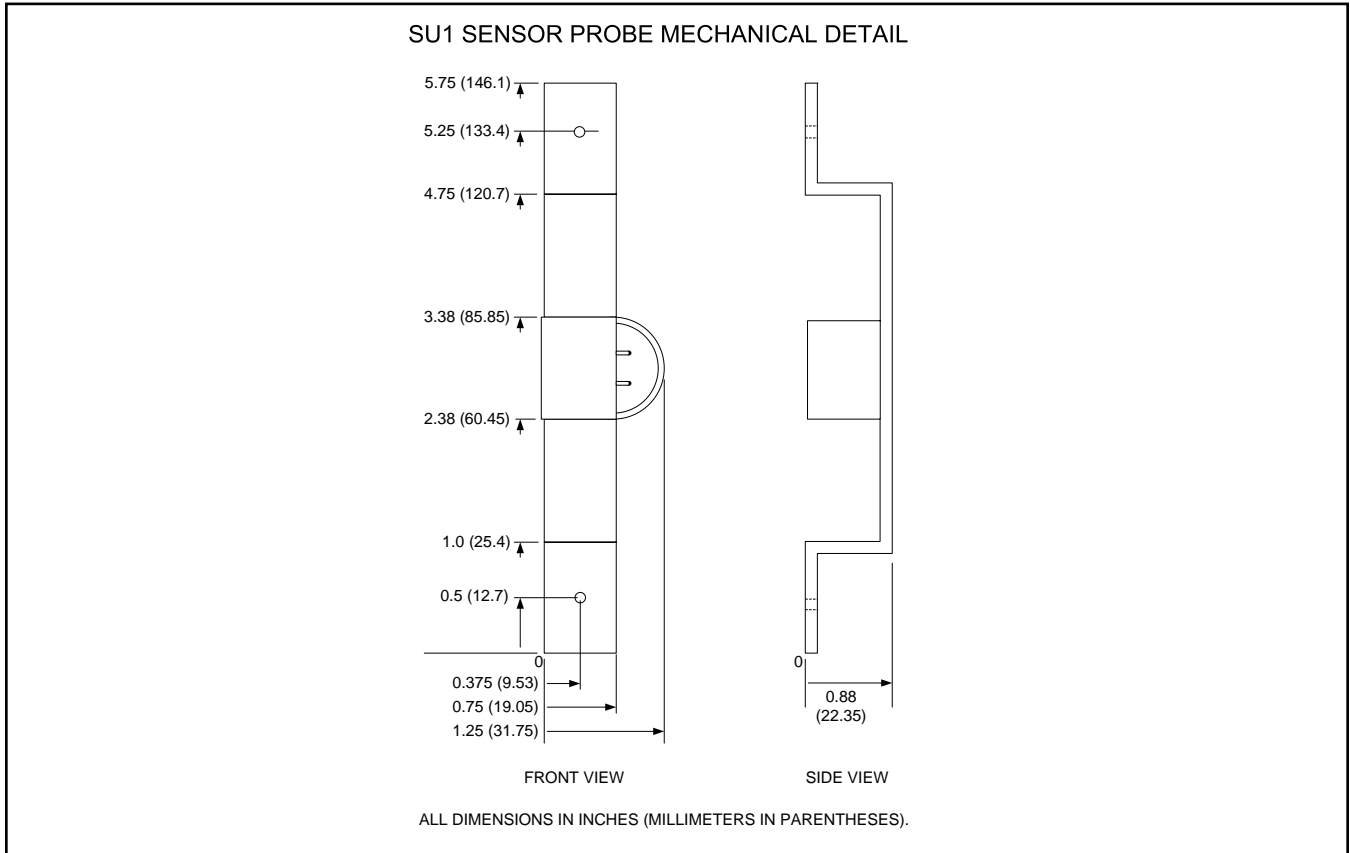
SU1 Sensor Probe Mechanical Dimensions
